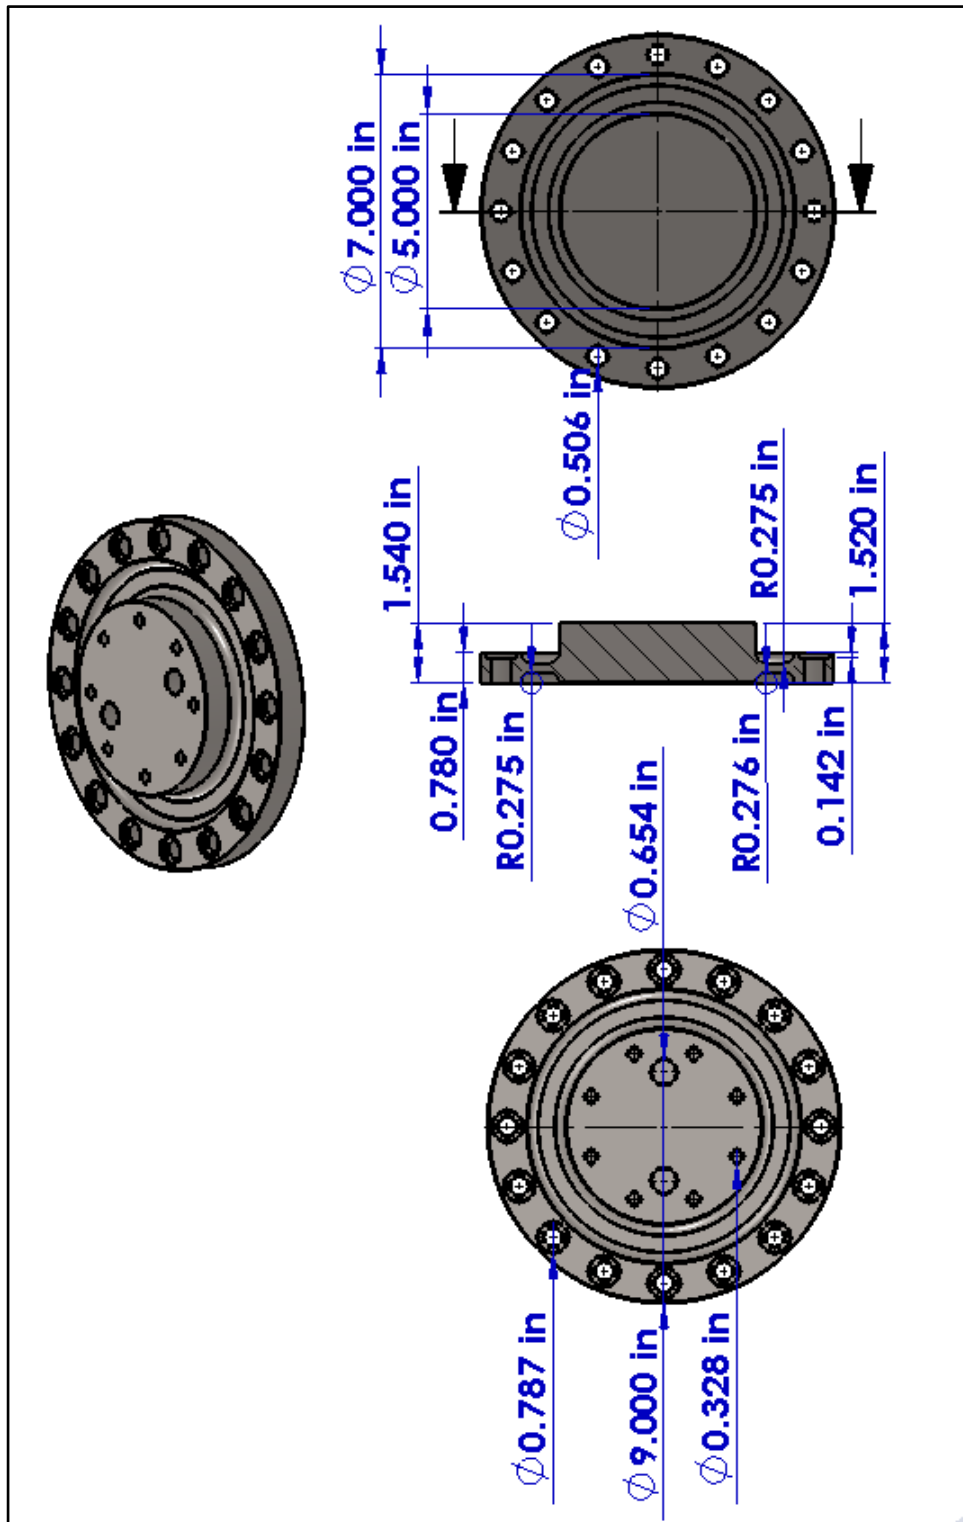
Piezoelectric Shaker Table Lid Component Dimensions
